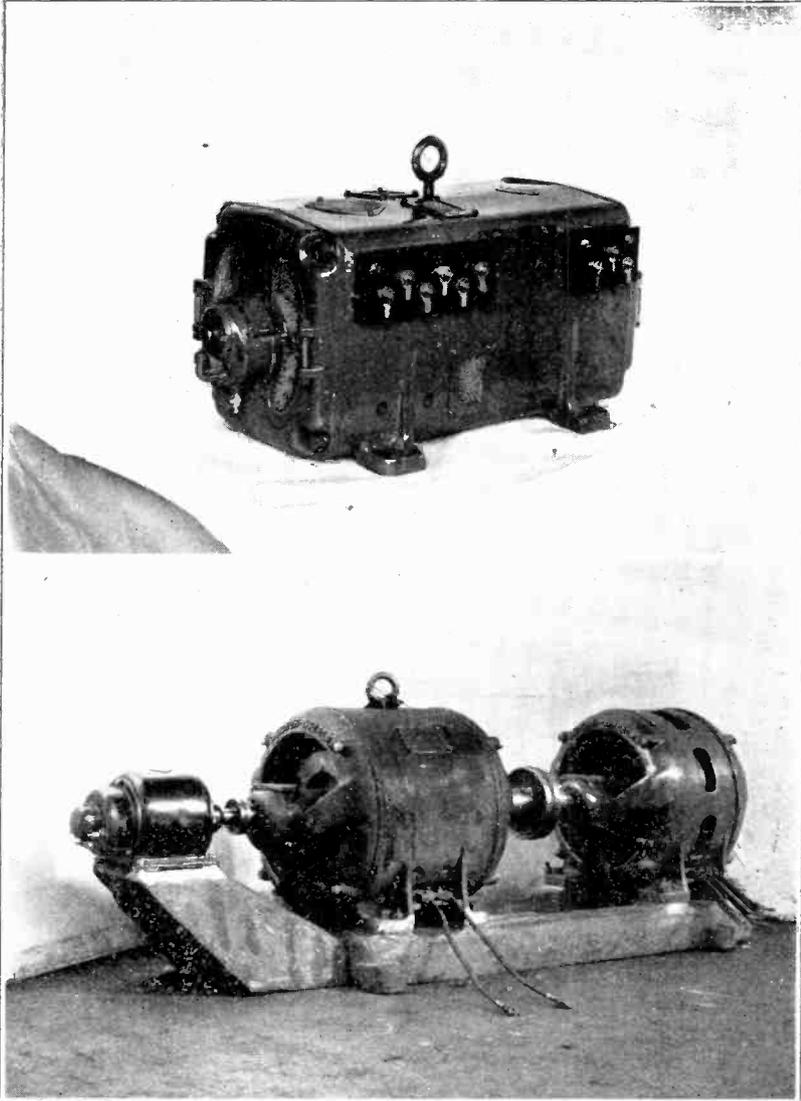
Exploded and Assembled views of a Two-Kilowatt Five Hundred cycle Motor Generator of the Inductor Type
